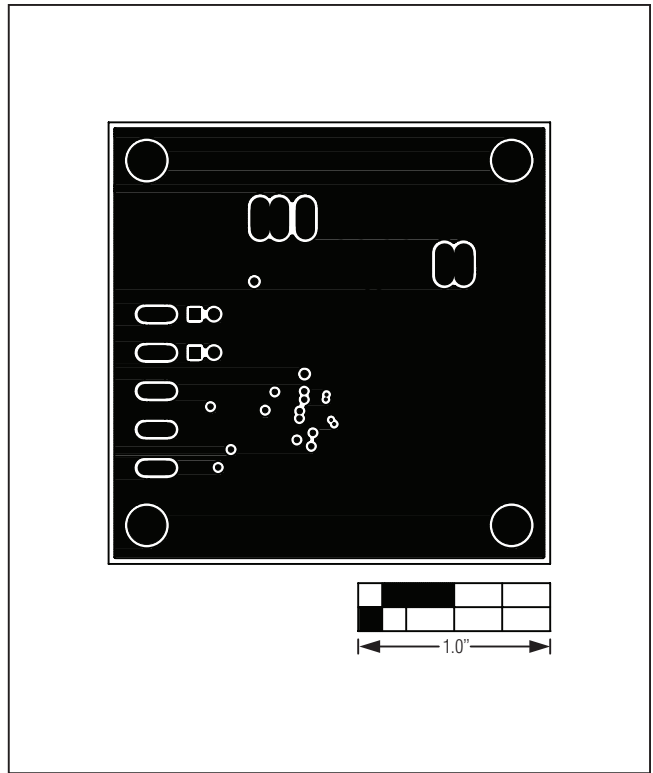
MAX15108 EV Kit PCB Layout—Inner Layer 2
